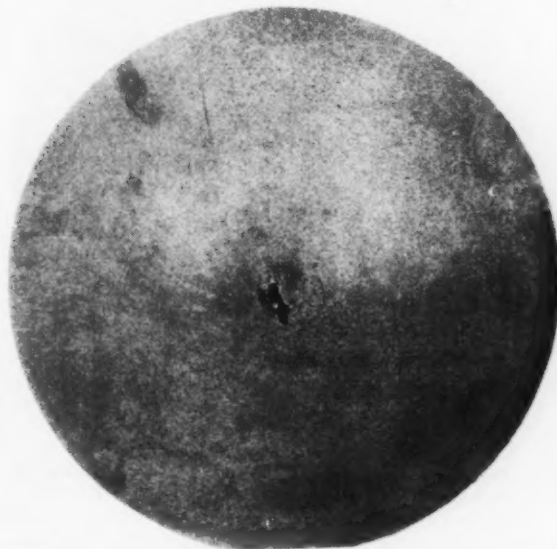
Typical defect located using $2\frac{1}{4}$ megacycle straight searching unit on drill collars.
